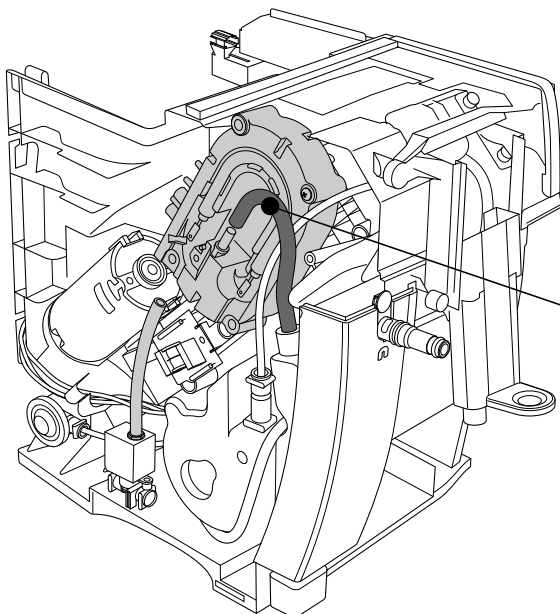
DISASSEMBLING ADDITIONAL EXPANSION CHAMBER
